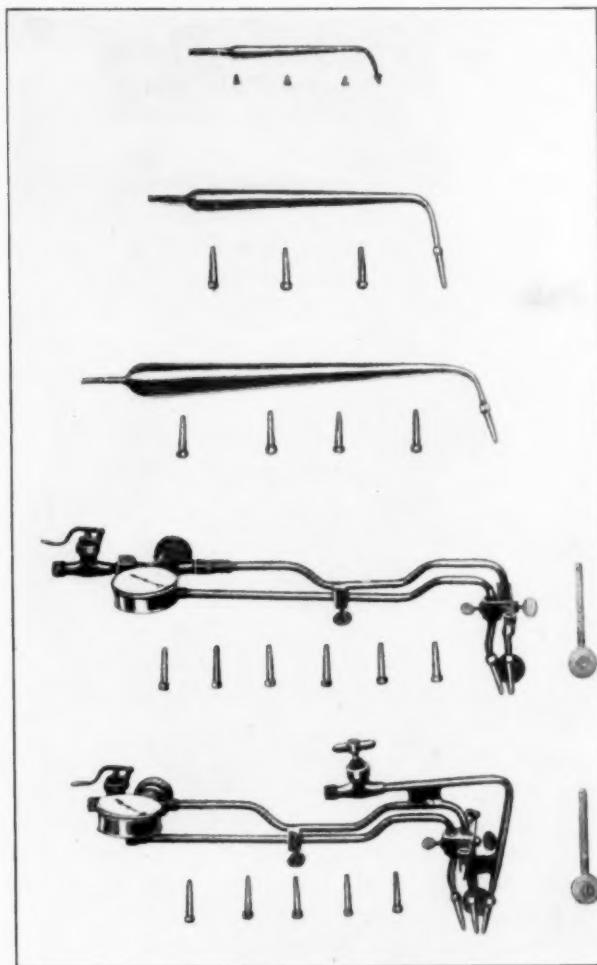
GROUP OF OXYHYDRIC WELDING AND CUTTING TORCHES
